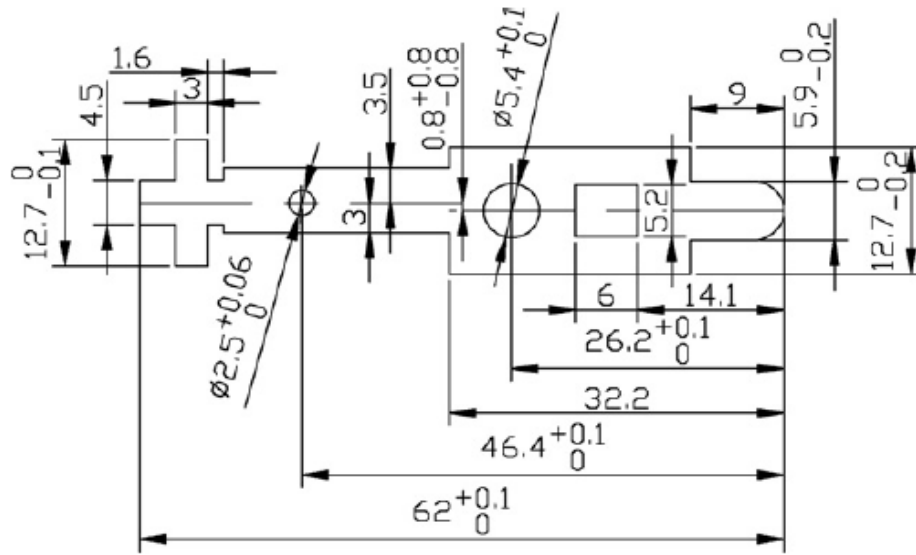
Example component (material, brass; sheet thickness, 0.6 mm; other dimensions, mm)
